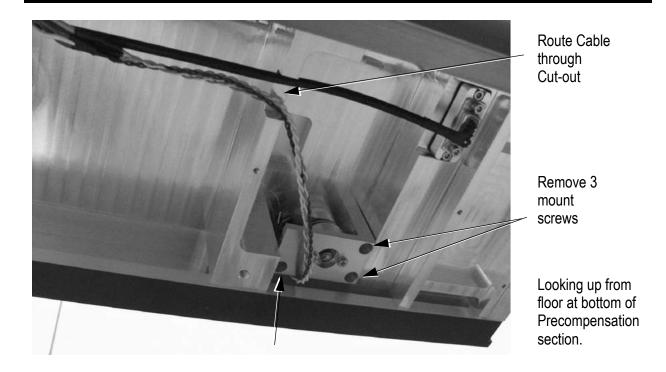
Shutter Actuator Mount Screws & Cable Routing
